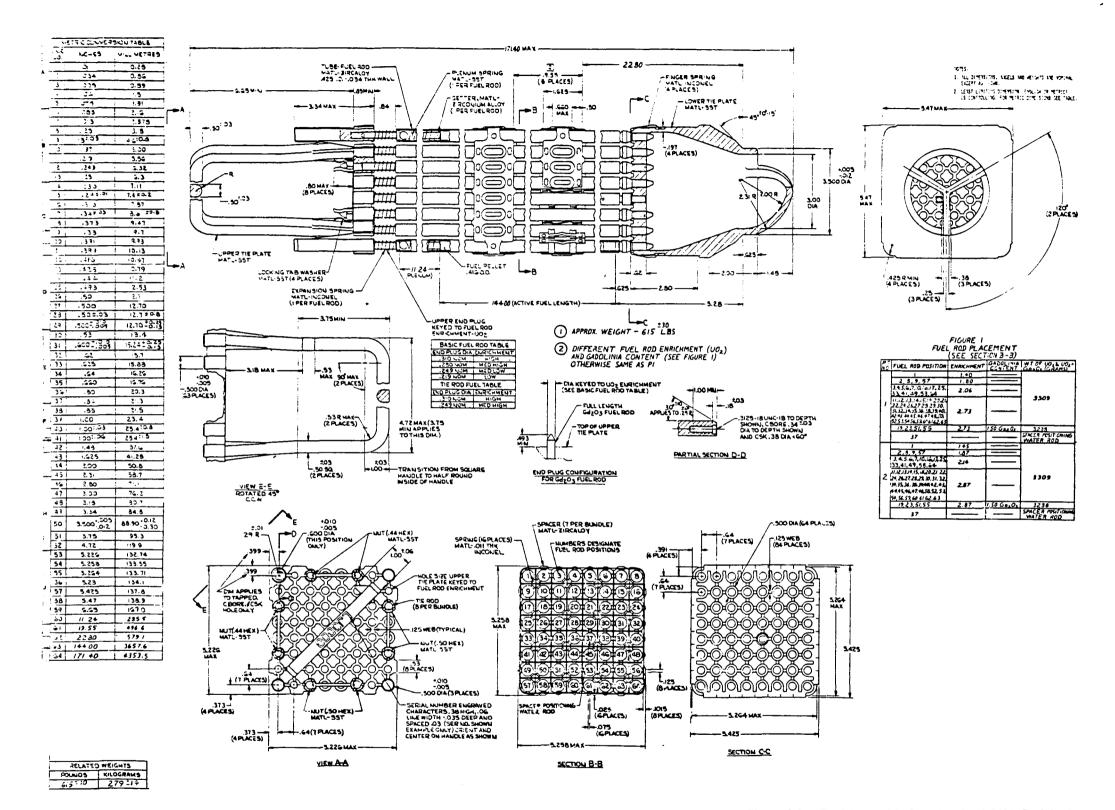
Fuel Assembly Drawing for 2.50% Enriched 8 x 8 Reload Fuel with Finger Springs
